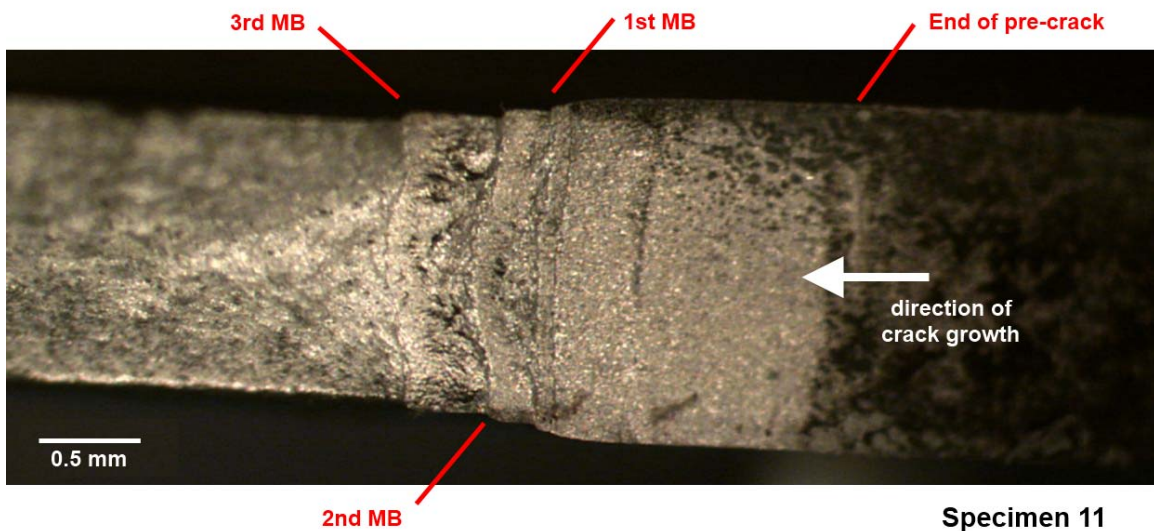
Fracture surface of Specimen 11, showing marker bands
